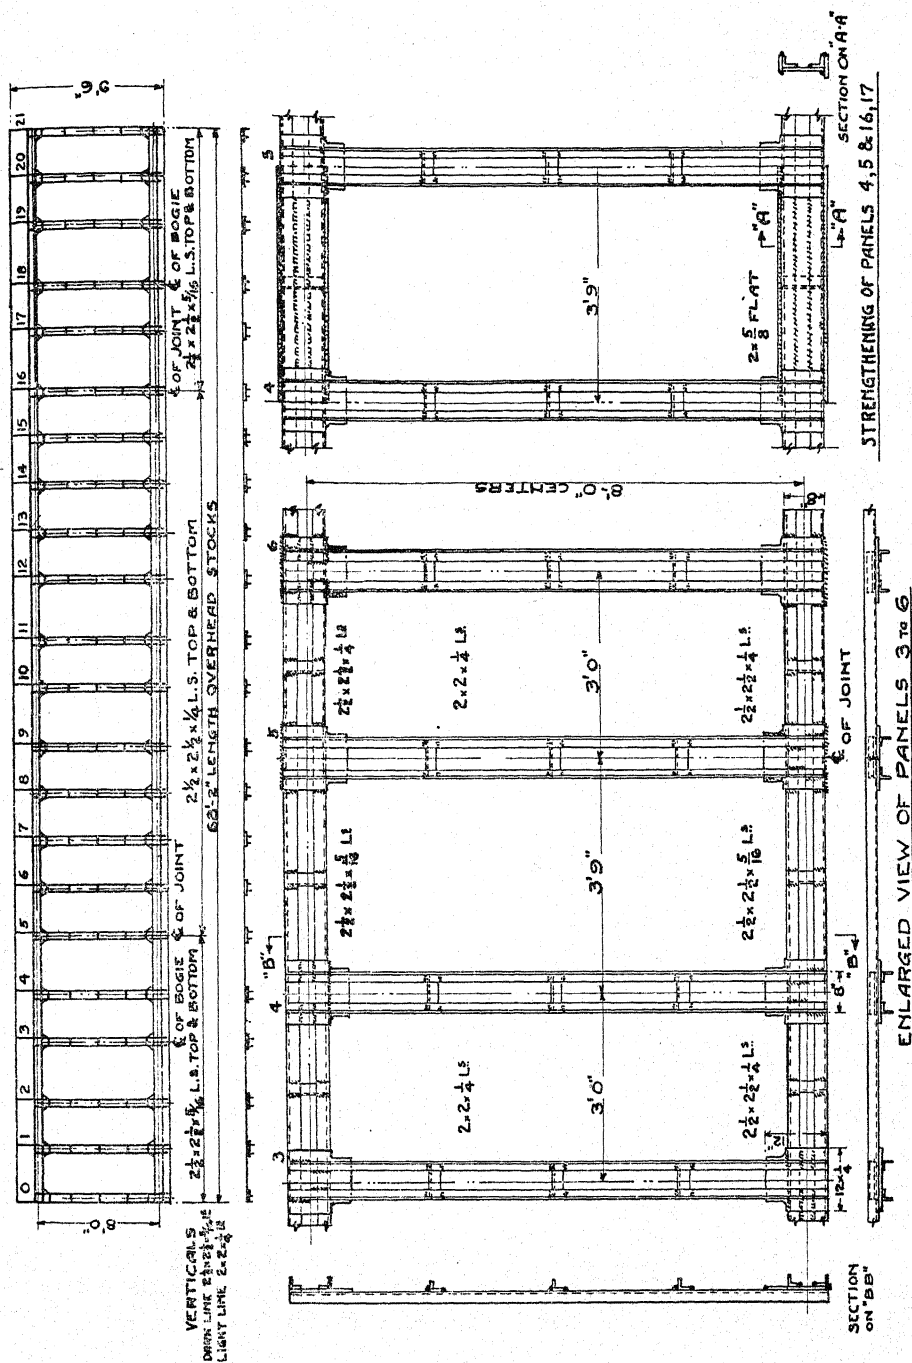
General layout of the experimental Vlerendeel coach frame girder.
